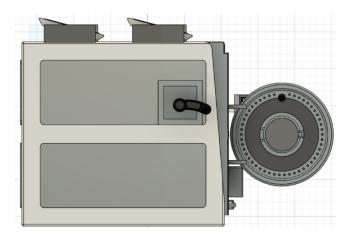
Sketch of the proposed washing machine design, viewed from the left. Designed using Autodesk Fusion 360.
